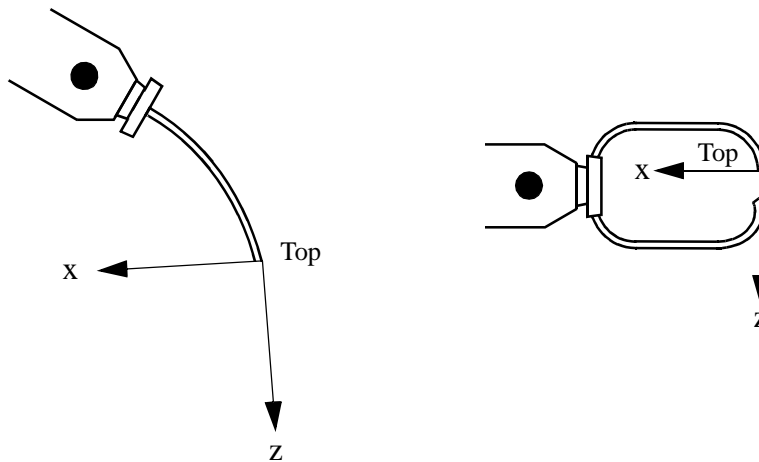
Tool coordinate system, as usually defined for an arc-welding gun (left) and a spot welding gun (right).
